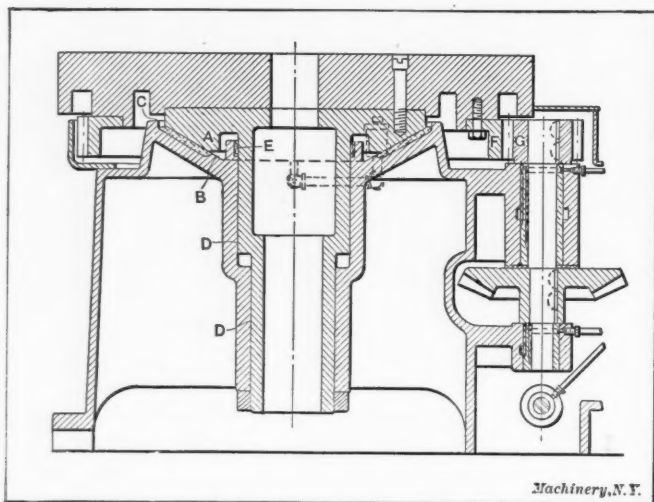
Construction of the Taper Spindle Bearing and Provision for Oiling
